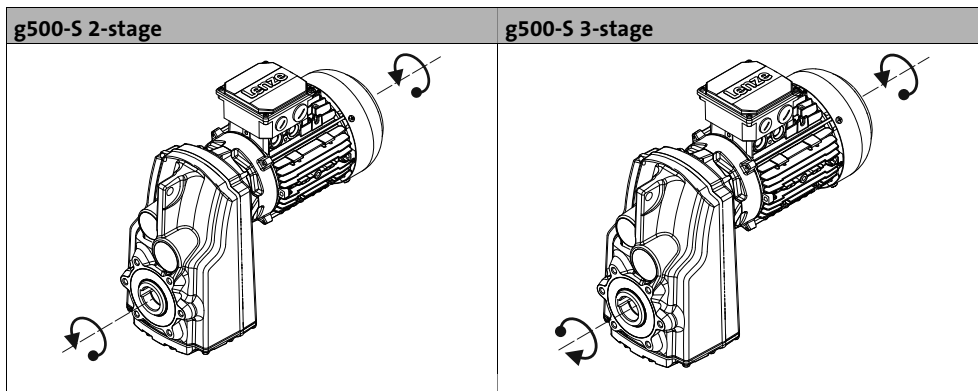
Rotating direction of drive shaft (here with three-phase motor)
